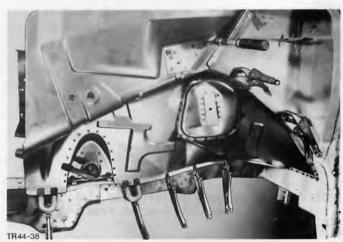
Apron panel punched in area of steering box mounting bracket and fixed with clamps.
